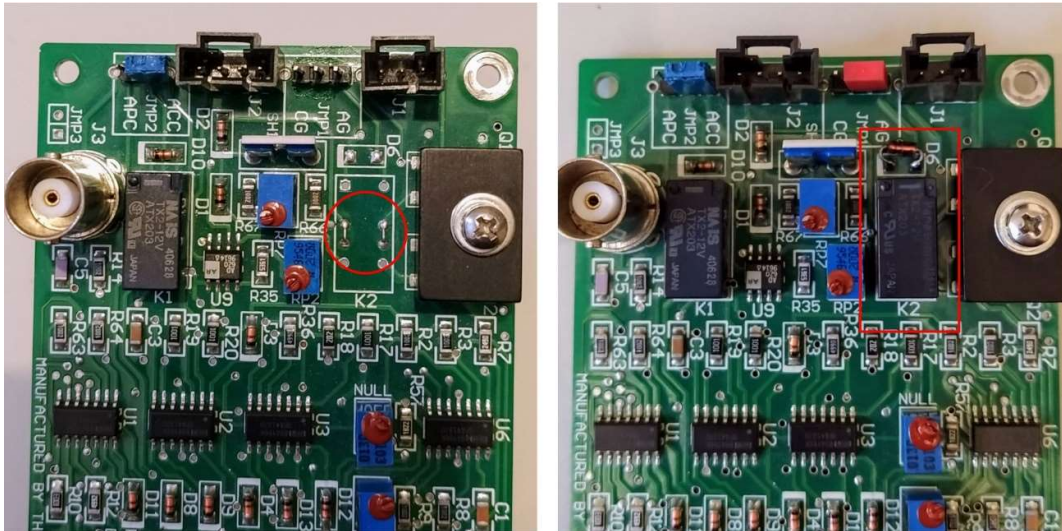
(left-hand side image) Thorlabs IP250-BV board before adding the D6 and K2 components, JMP1 connector already installed. The red circle shows the jump wires that must be removed before soldering the K2 relay. (right-hand side image) D6 and K2 components installed.
